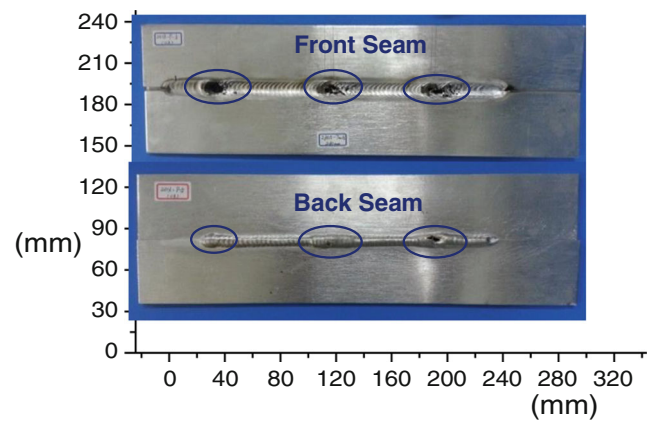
Weld seam showing porosity at locations where hydrocarbon had been placed before welding
